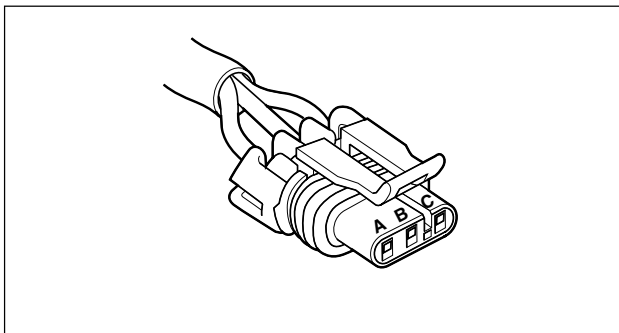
Packard Pull-to-Seat Terminal Connector With Locking Ear
